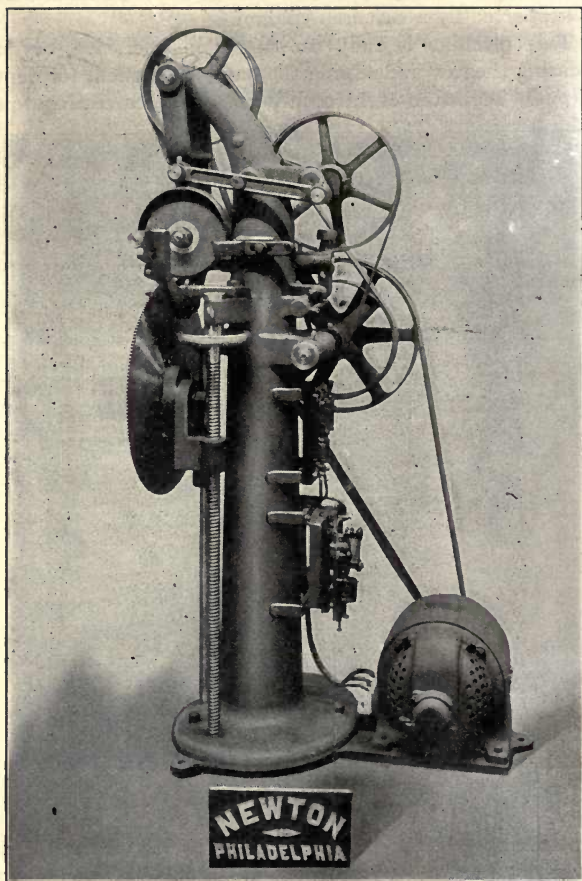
Newton self-contained automatic cold-saw sharpening machine.
